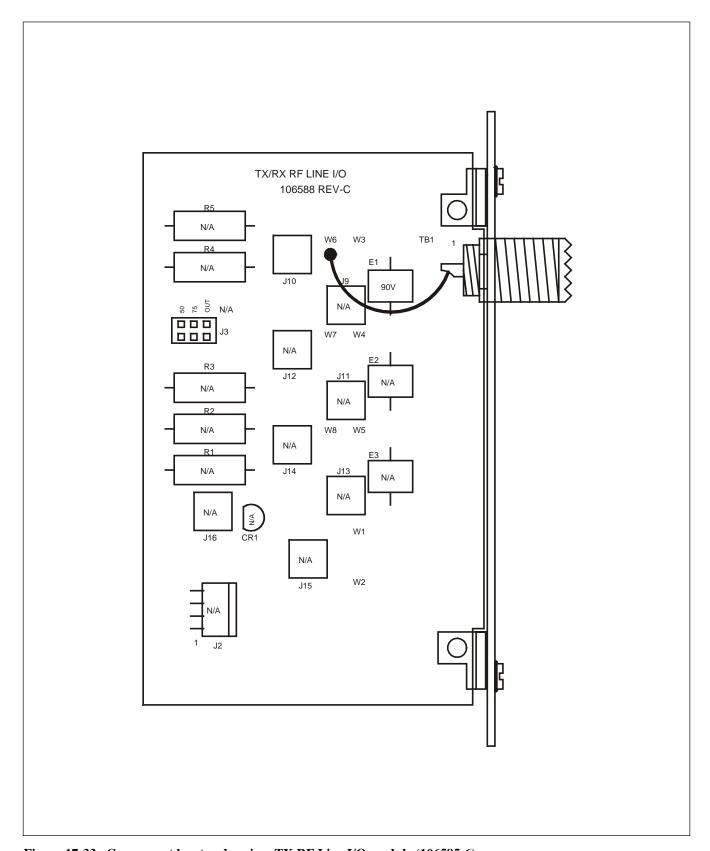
Component locator drawing, TX RF Line I/O module (106585-6)
